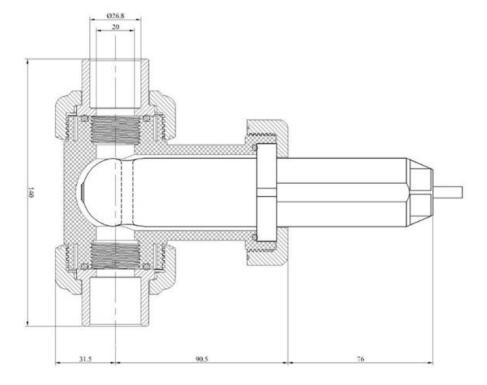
Dimension of the ST-730/730B/731/735 and the ST-001 Tee Assembly (mm)
